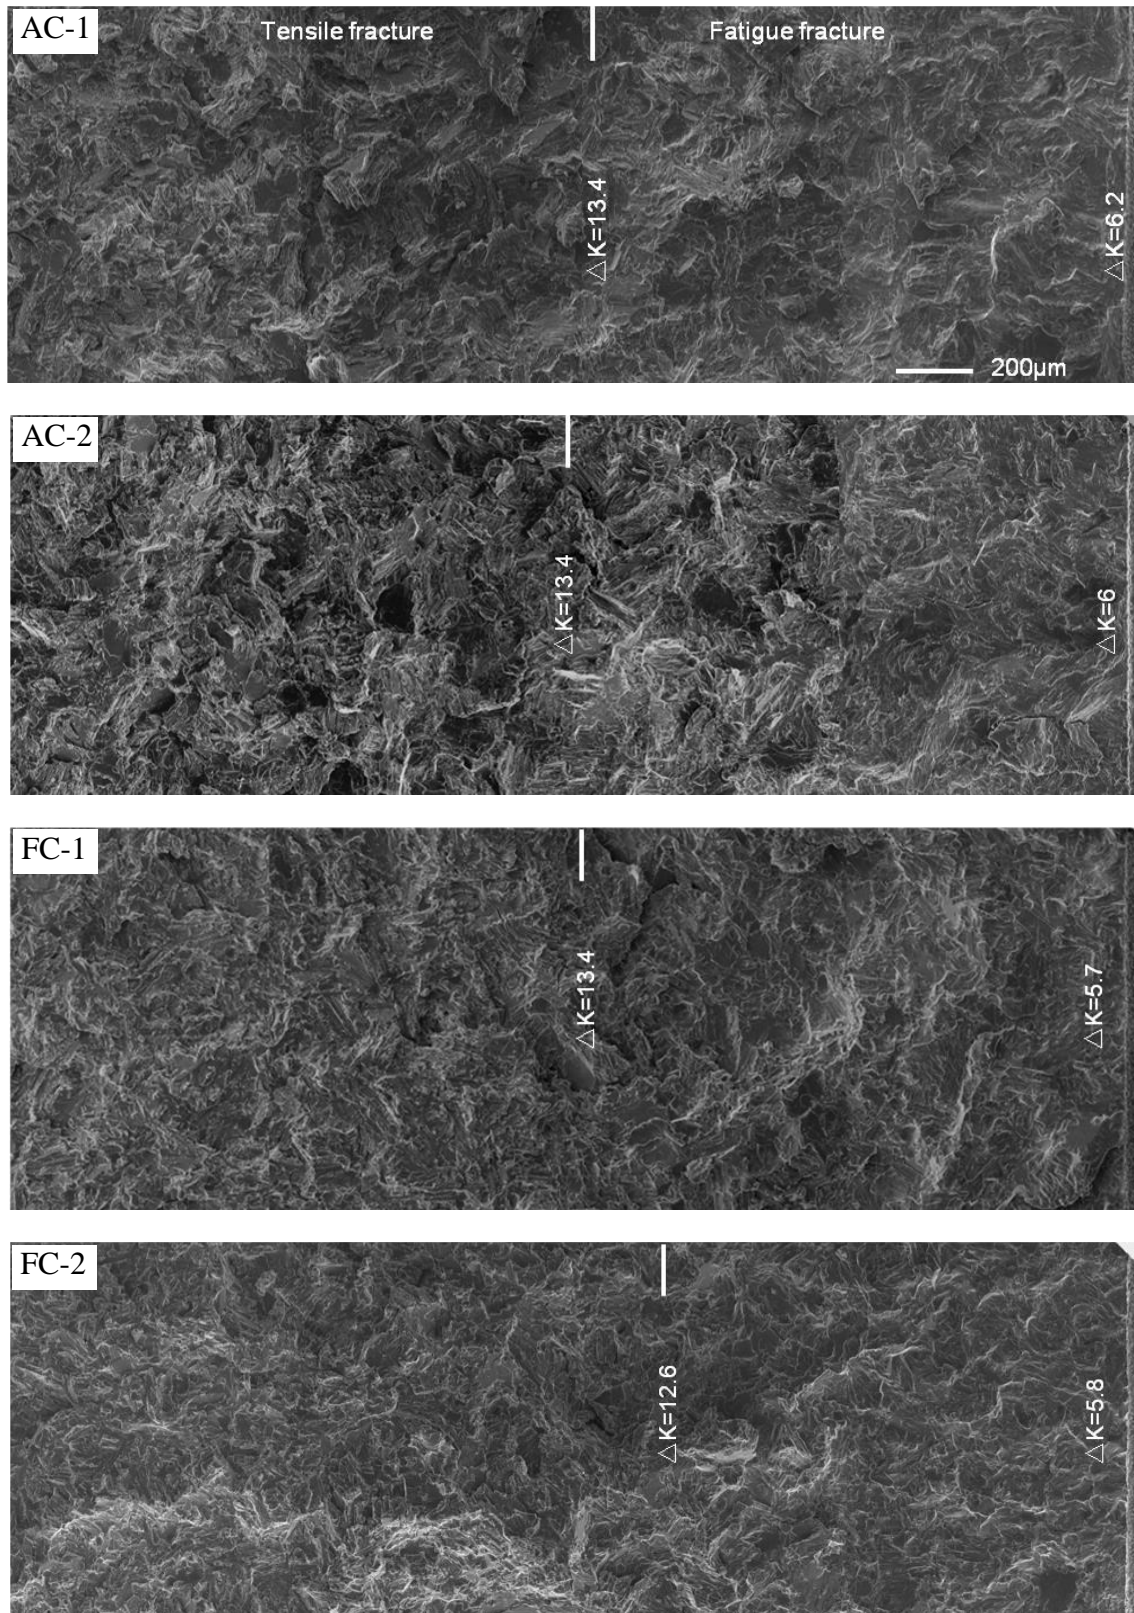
SEM montage showing the fracture surface of test pieces AC and FC. The crack propagation direction is right to left.
